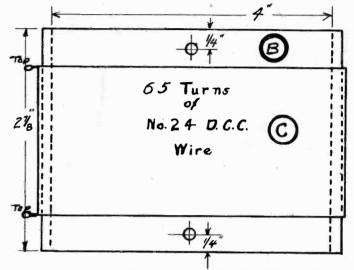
Dimensions of cardboard or fibre tubing (B). Winding for wave trap (C). This tubing is drilled as shown, according to the dimensions marked.
